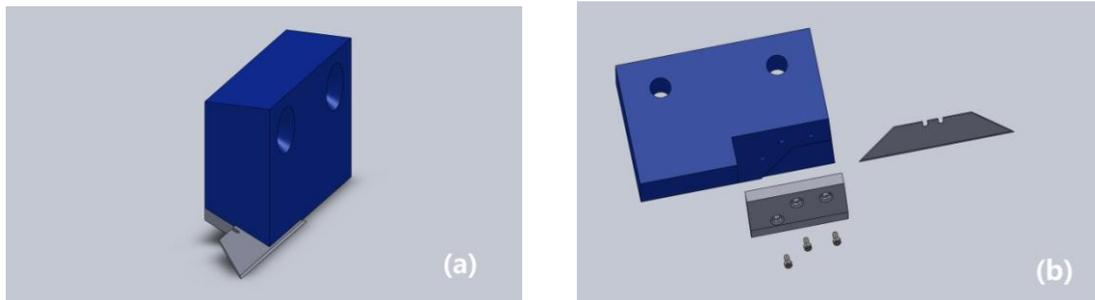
Exacto- Blade and blade holder a) Parts separated b) Parts combined
